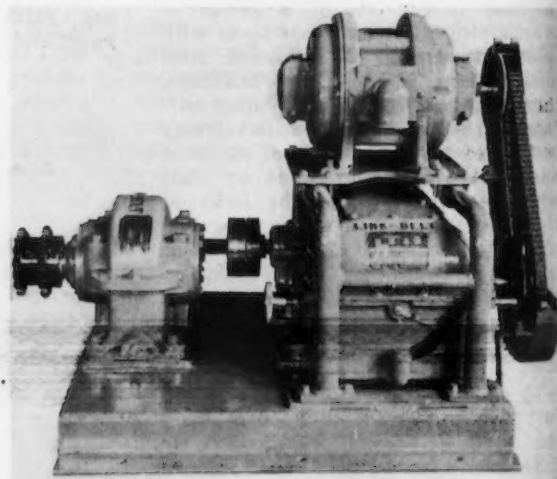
Variable speed unit (at left) of the chain principle with motor driving unit through chain.
